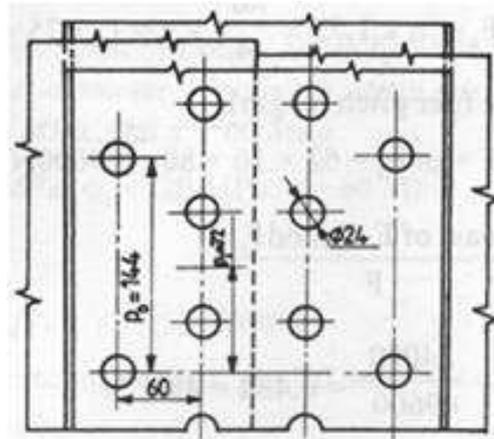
Double riveted, double strap, zig-zag butt joint
